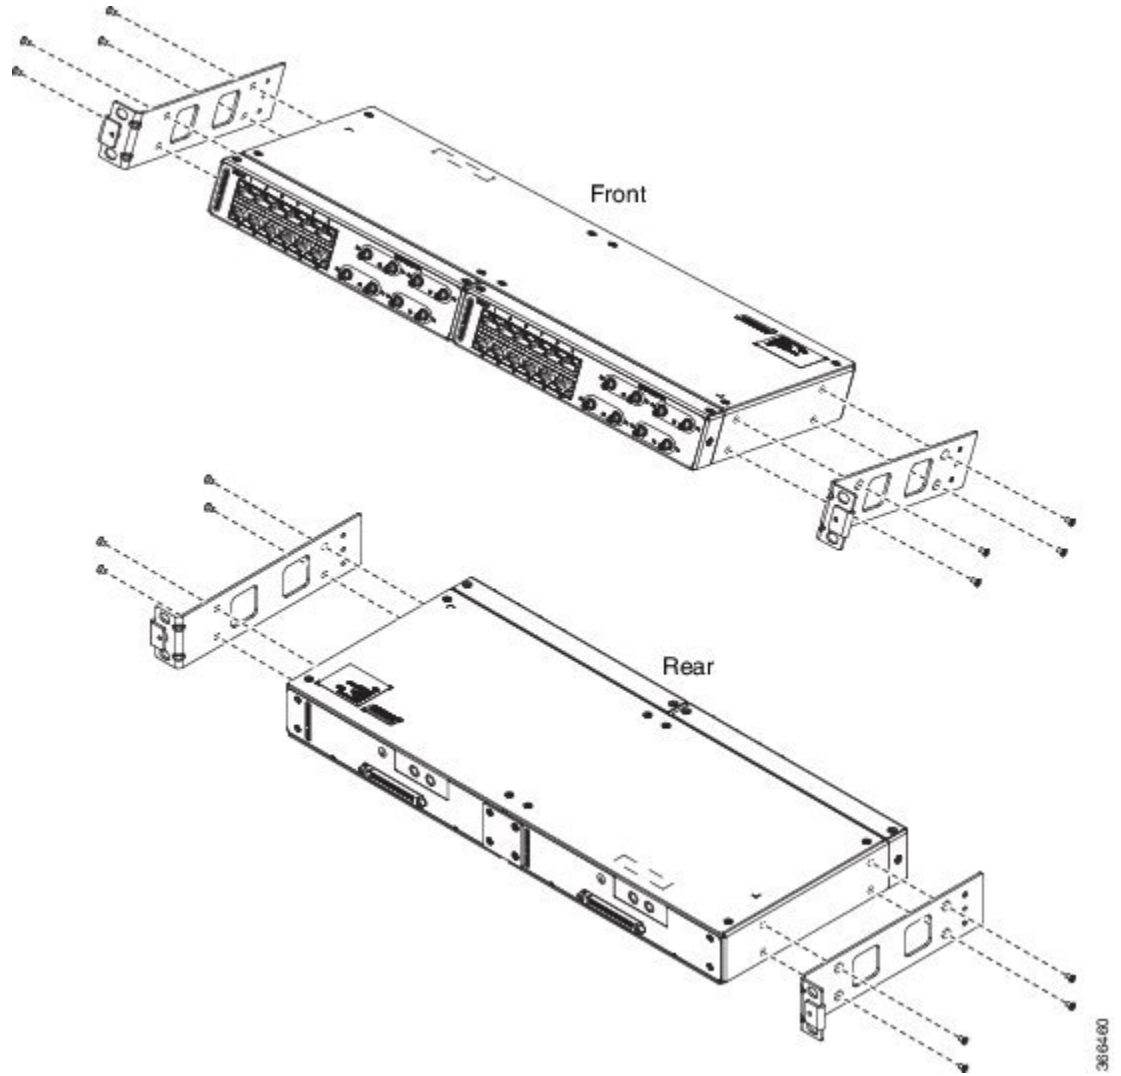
Installing the Patch Panel - Single in a 21-inch Rack
